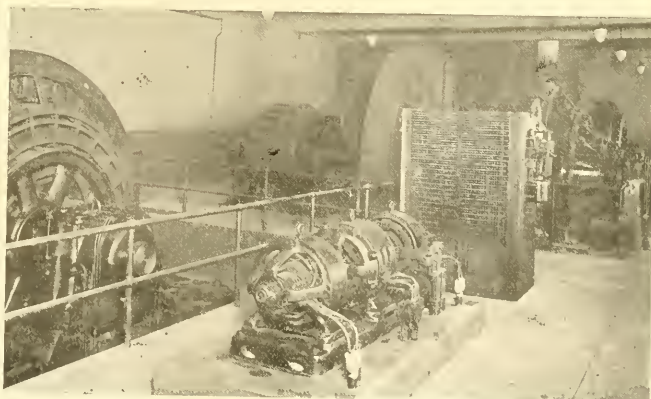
REVERSING EQUIPMENT FOR DRIVING THE ROUGHING STAND OF THE 84 INCH COMBINATION MILL SHOWN IN FIG. 2
